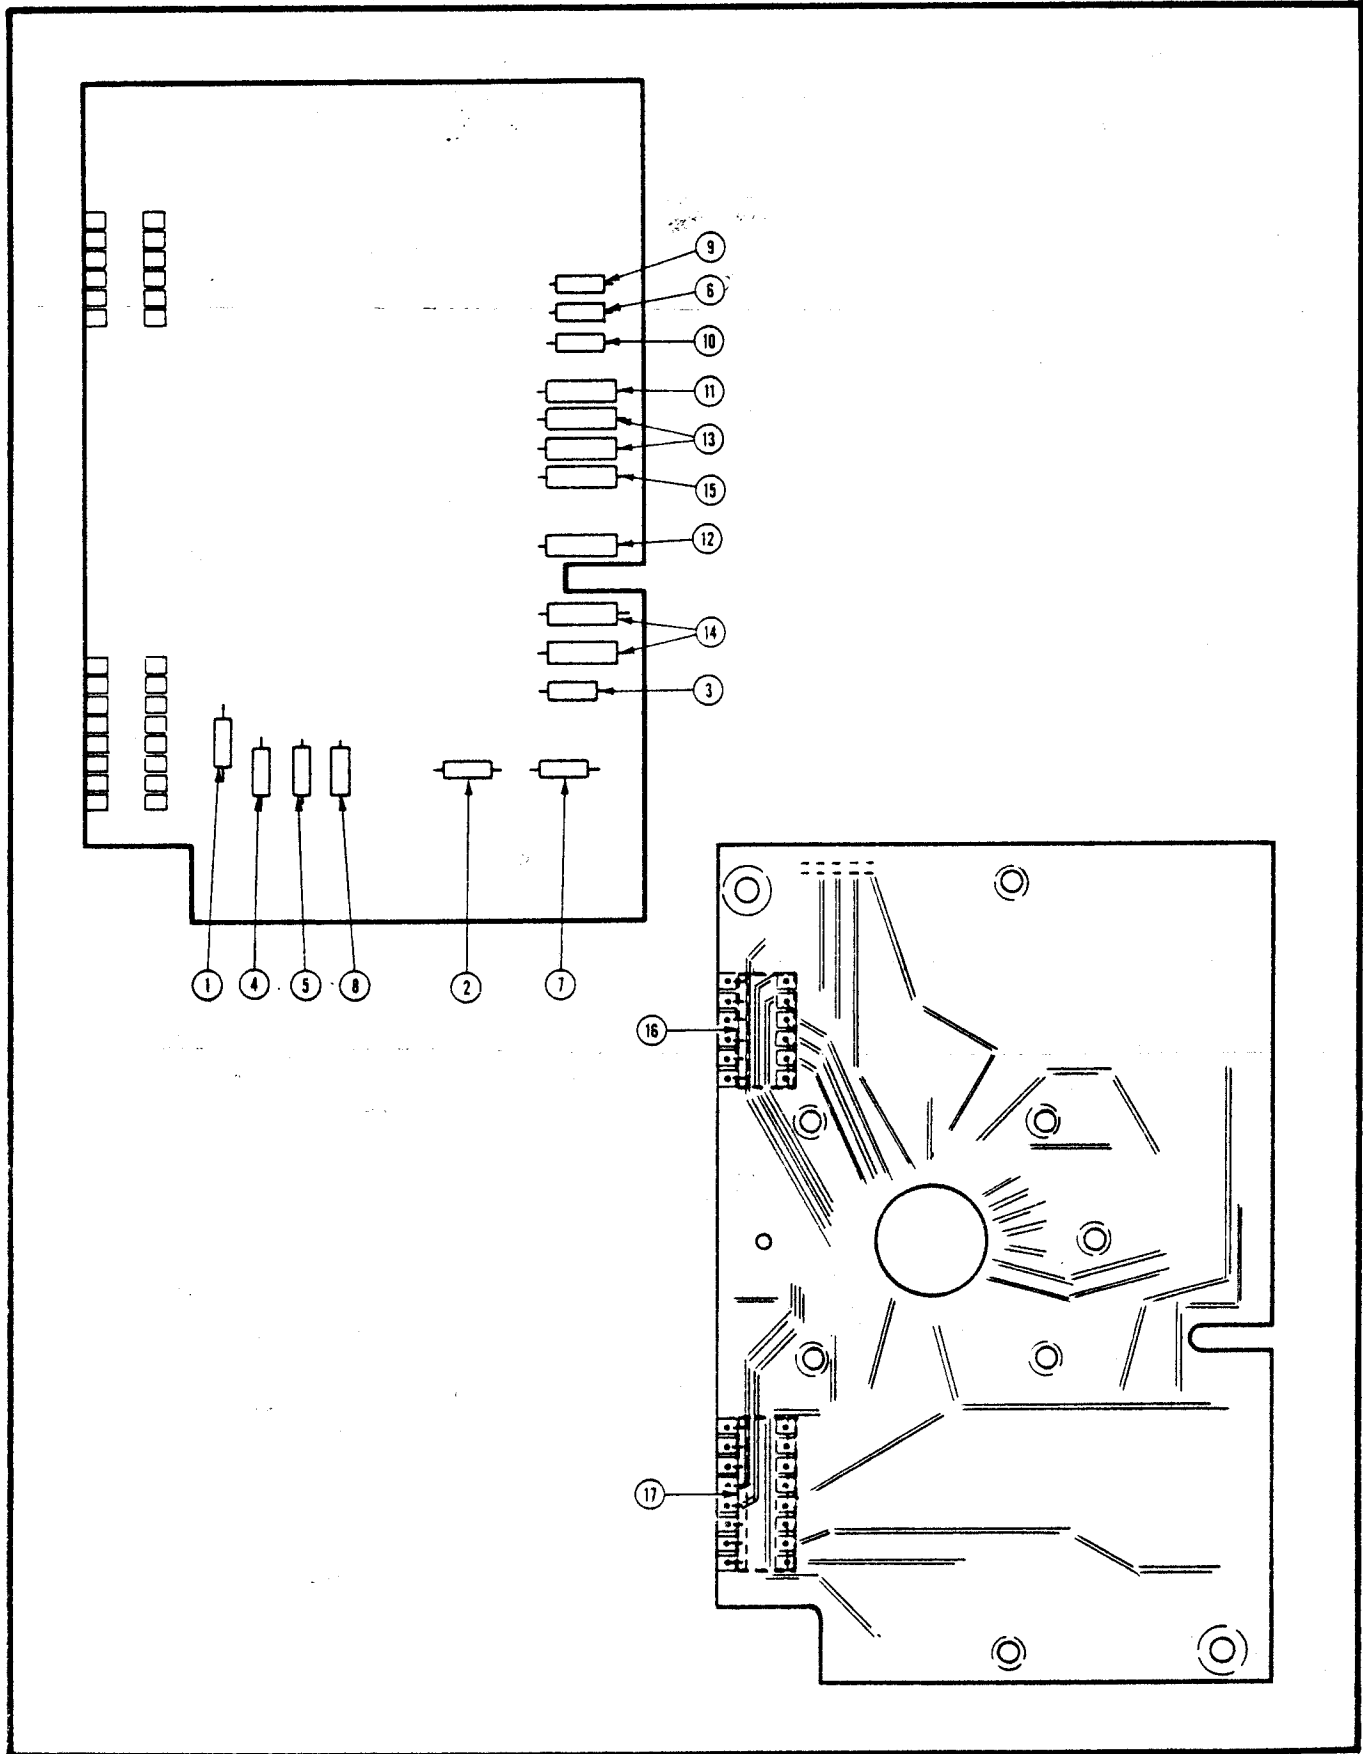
A9 Circuit Board Assembly, A Timing (sheet 1 of 2).
